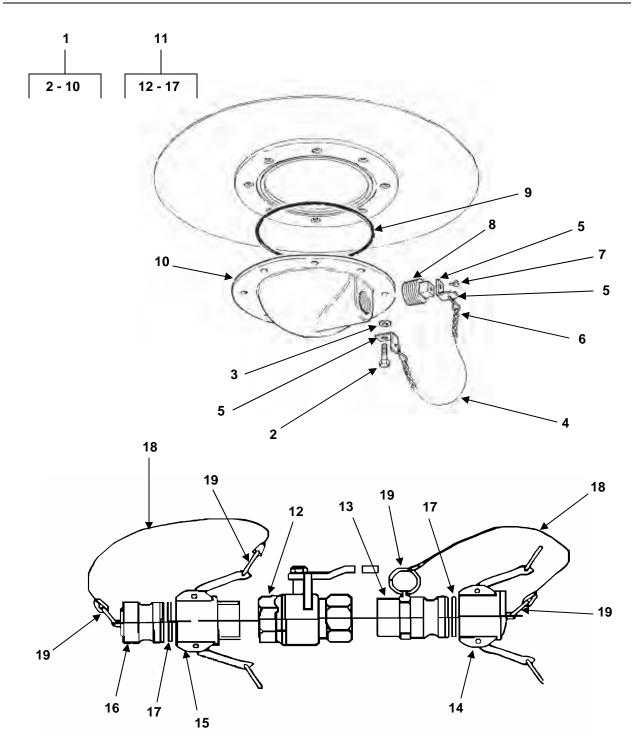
Drain Fitting Assembly and Ball Valve Assembly (Model GTA-210KF)
